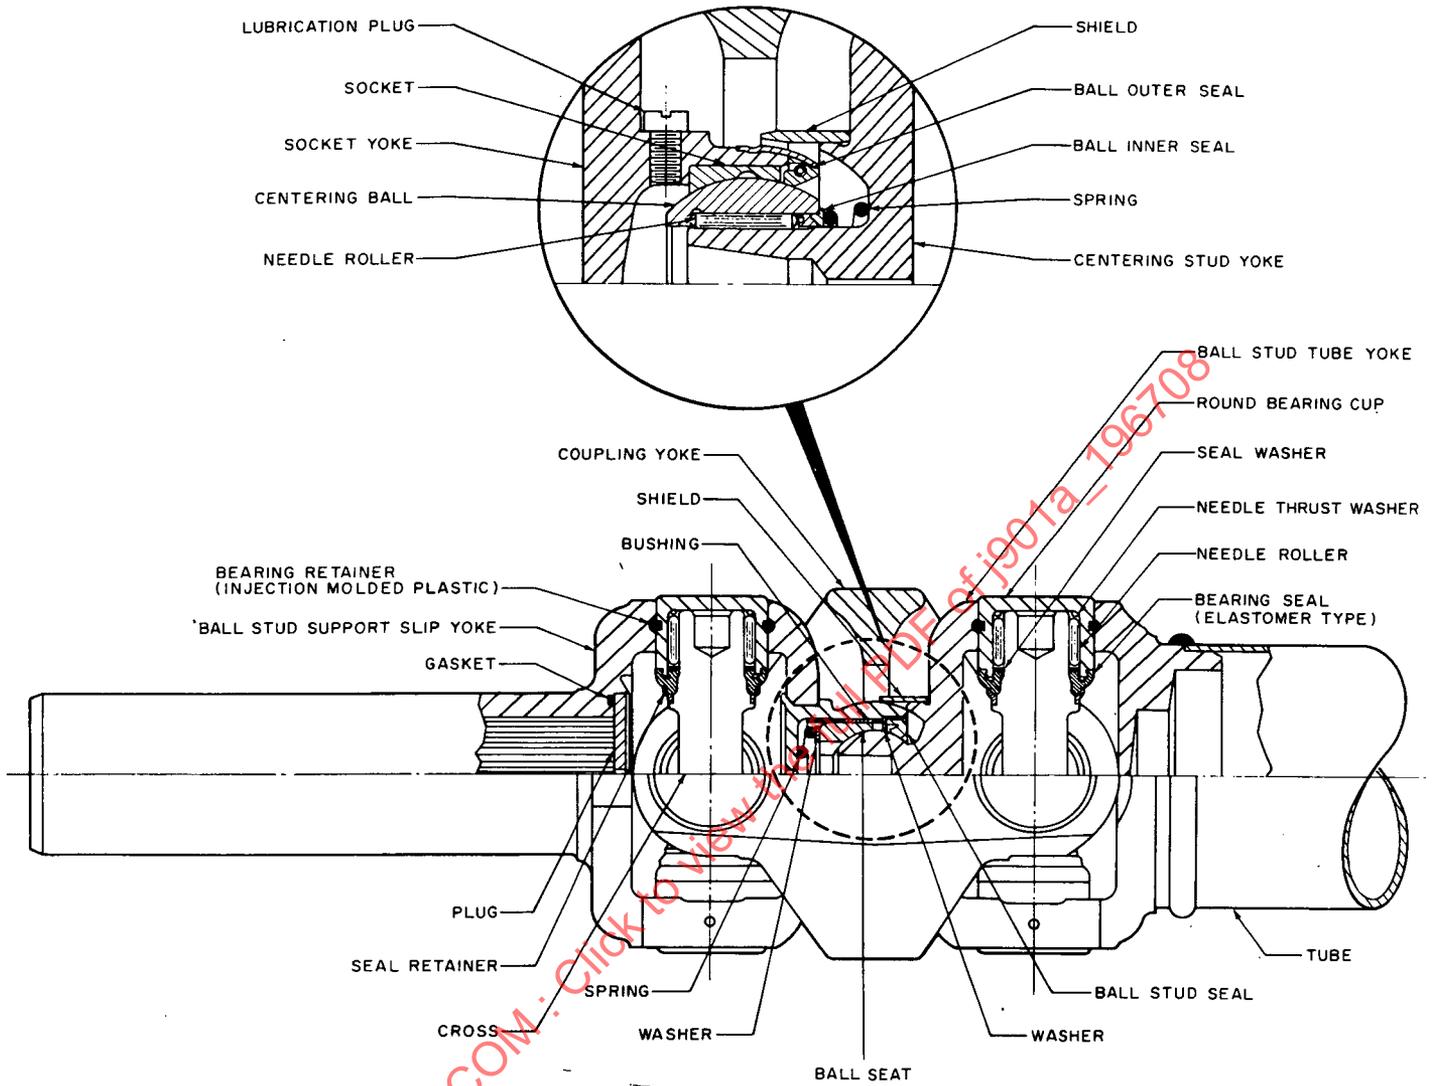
DOUBLE CARDAN UNIVERSAL JOINT (INTERNAL SUPPORTING AND CENTERING TYPE BALL STUD AND SEAT CONSTRUCTION)
